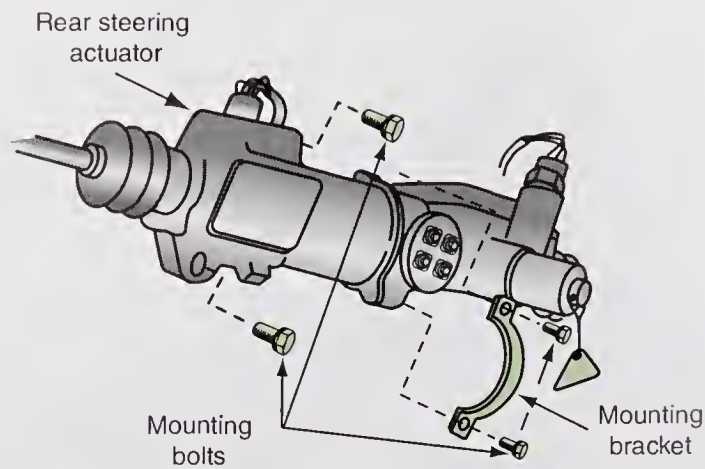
Installing the rear steering actuator, four mounting bolts, and bracket.
